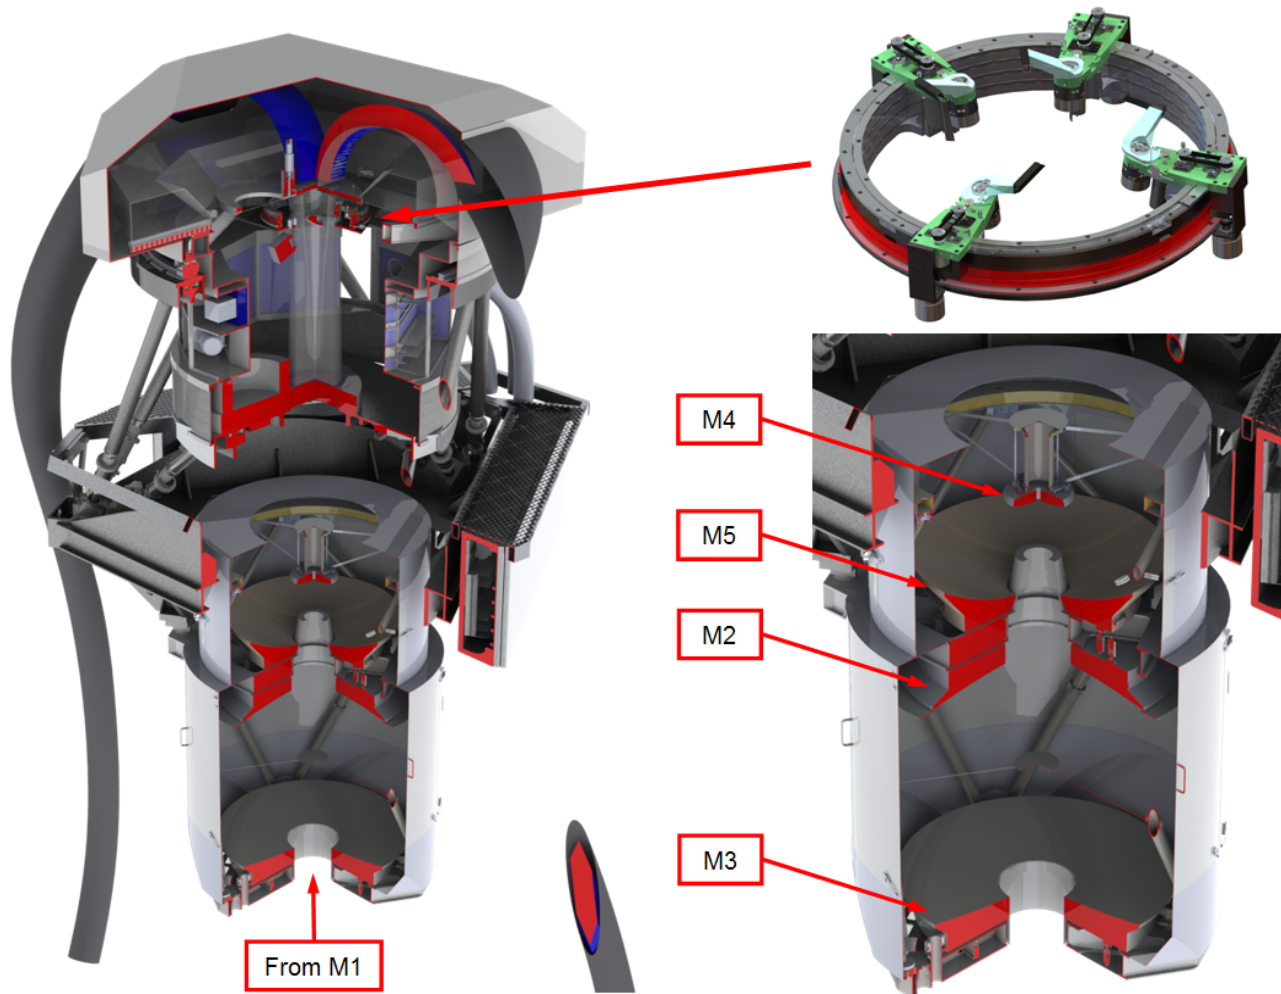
Close up views of the PFIP (left), WFC (lower right), and guide and wavefront sensor probe assembly (top right).
